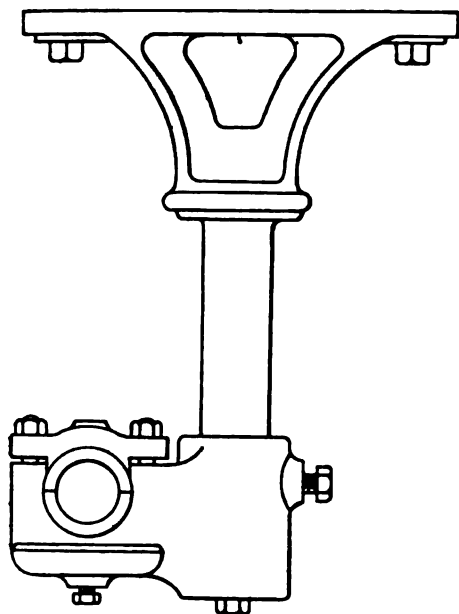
Plummer Block adjustable on Hanging Bracket.
